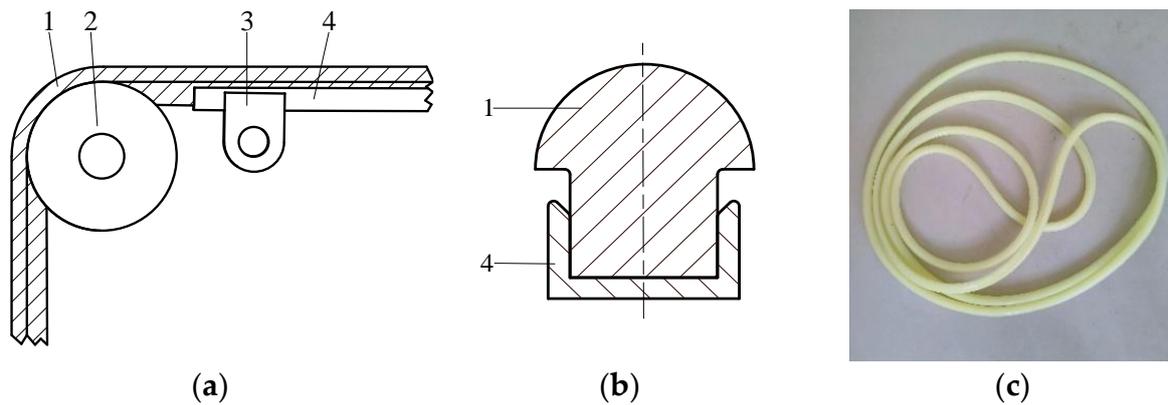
The shape of grading belt. (a) Assembly of grading belt and guide groove; (b) Cross-sectional shape of belt; (c) A grading belt in kind. 1. Grading belt. 2. Pulley. 3. Support clip. 4. Belt guide groove.
